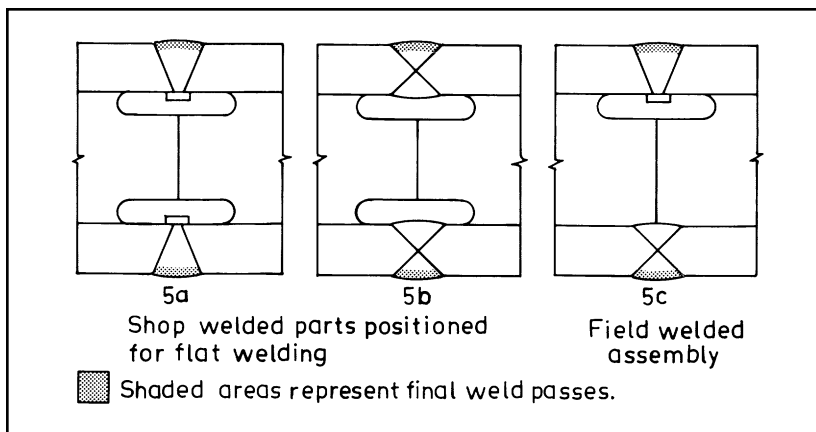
Final weld passes should be made on the outer surfaces of the weld flanges wherever possible.
